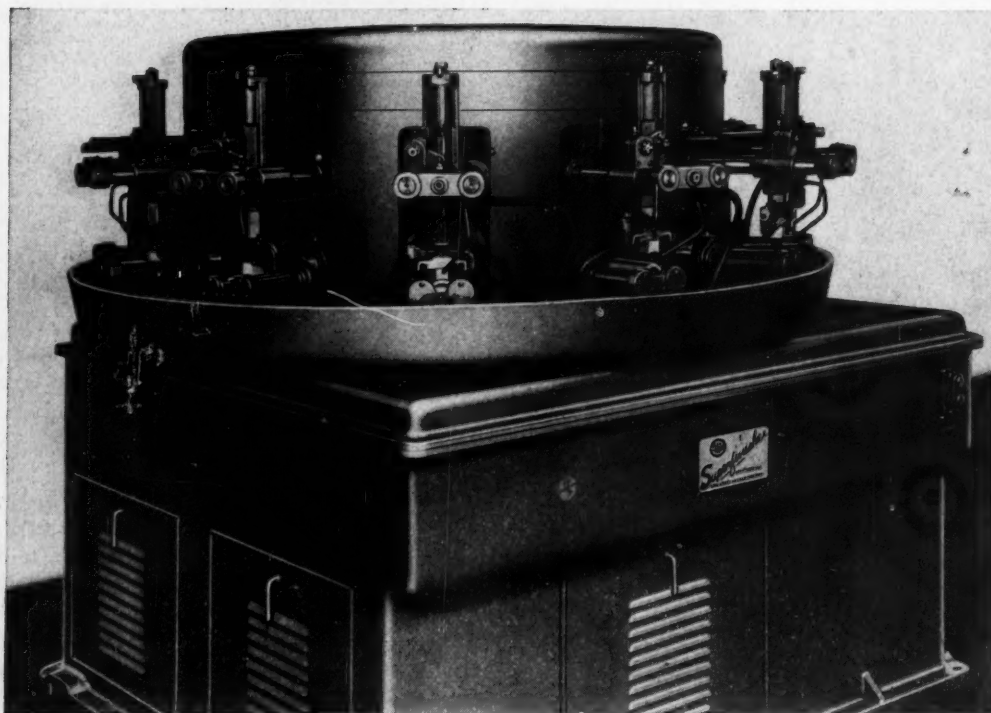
Left — Twelve-station Superfinisher for high production of small and medium-size cylindrical parts. Shown with roll drive for centerless parts, providing average production of 600 to 700 pieces /hr
